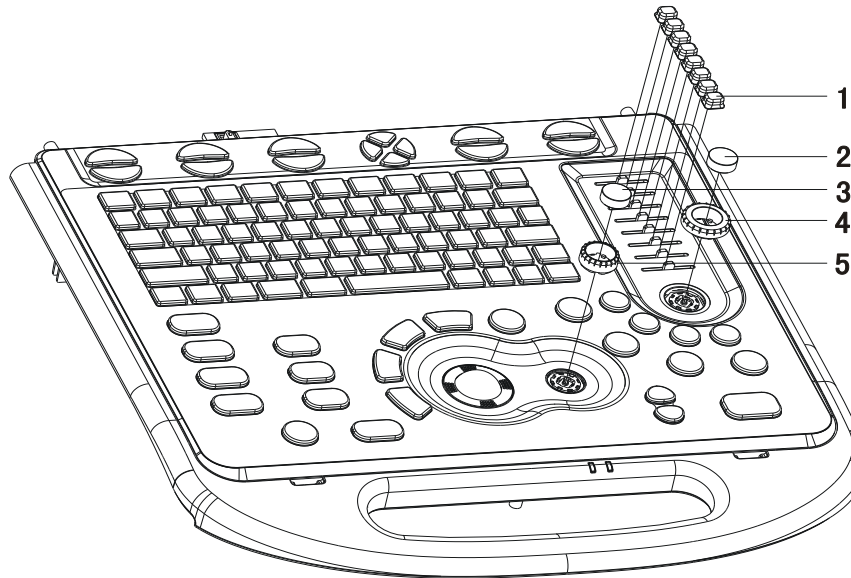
Removing the TGC Sliders, Encoder Knob and Button
